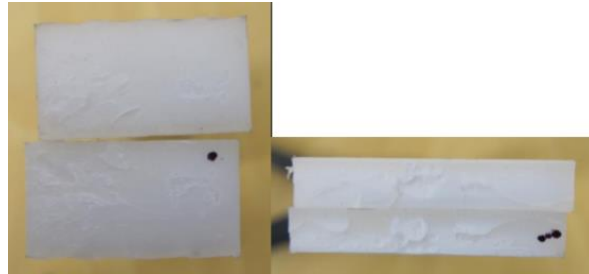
Fractured PVDF Samples (cross-sectional view) [29]
